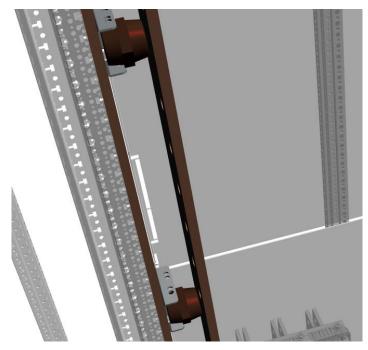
mounting details concerning N-PE solution 3P MCCB cabling
